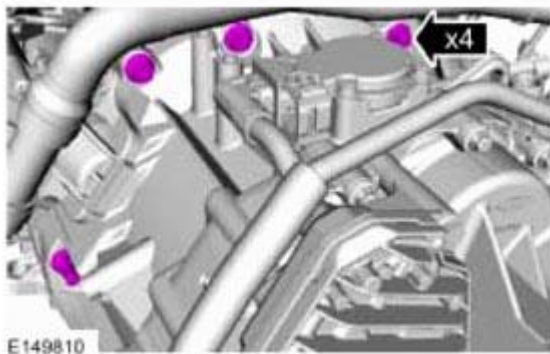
Identifying Bellhousing-To-Engine Fasteners
